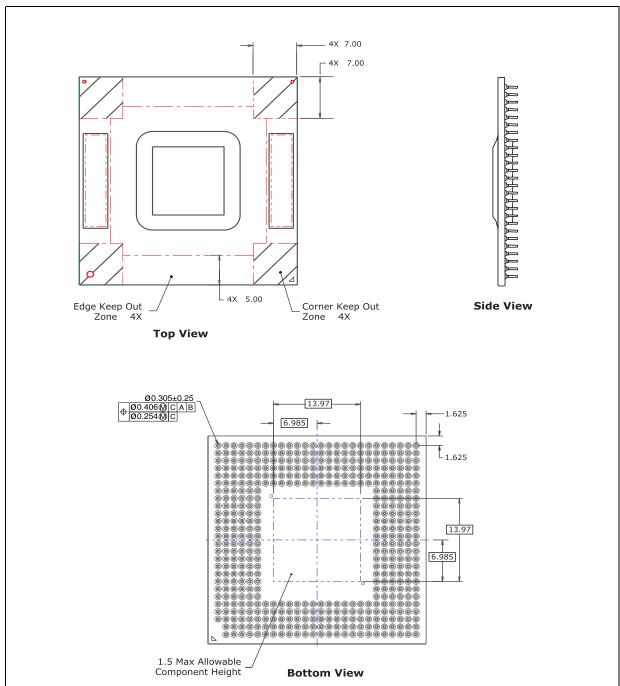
2-MB Micro-FCPGA Processor Package Drawing (Sheet 1 of 2)
